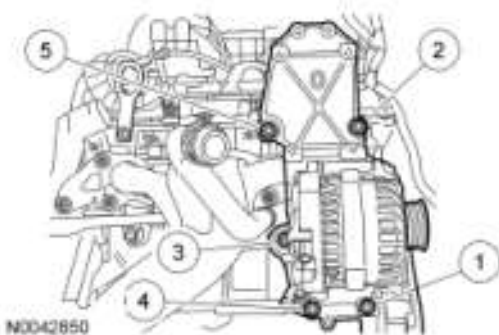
Identifying Generator And Support Bracket Assembly With Bolts
